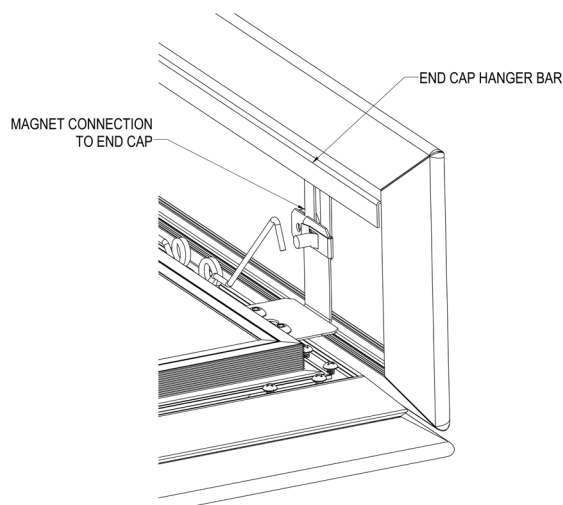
END CAP BRACKET CORE MOUNTED
